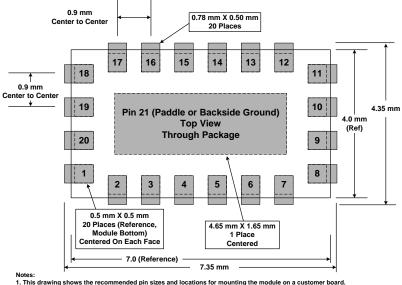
7x4mm Module Package Drawing for Footprint Design
